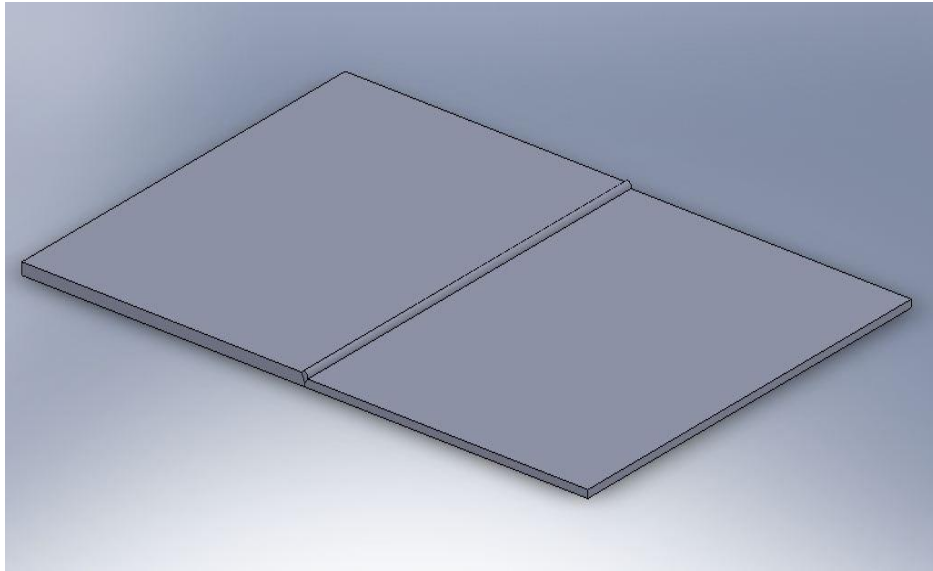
Isometric view of assembling parts with weld bead
